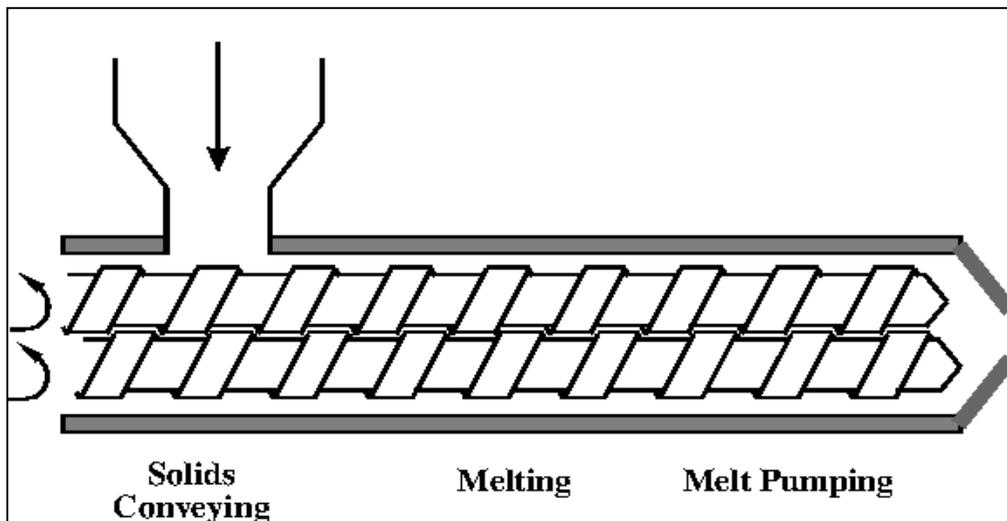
Co-rotating twin-screw extruder diagram[138].
